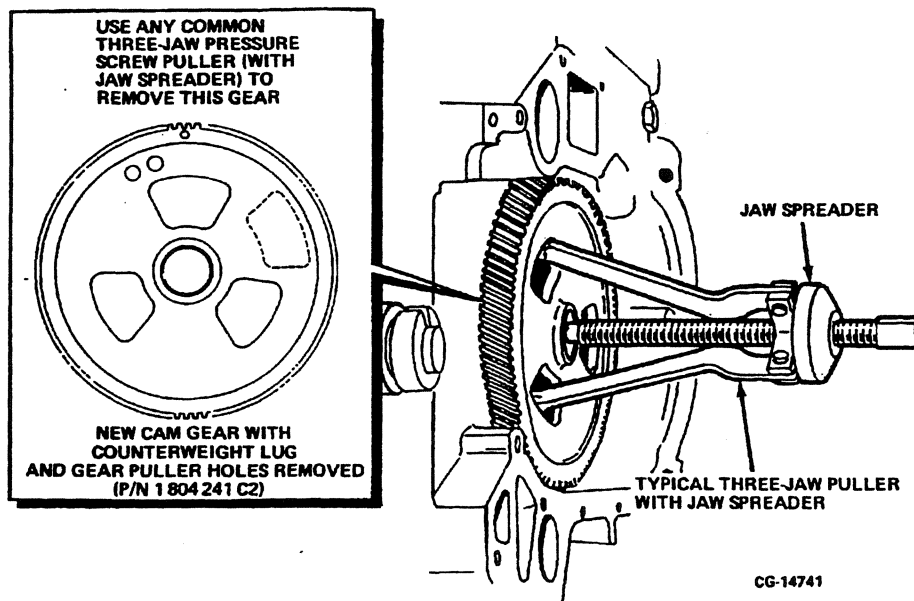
B. Removing New Camshaft Gear Using Typical Three Jaw Puller.
